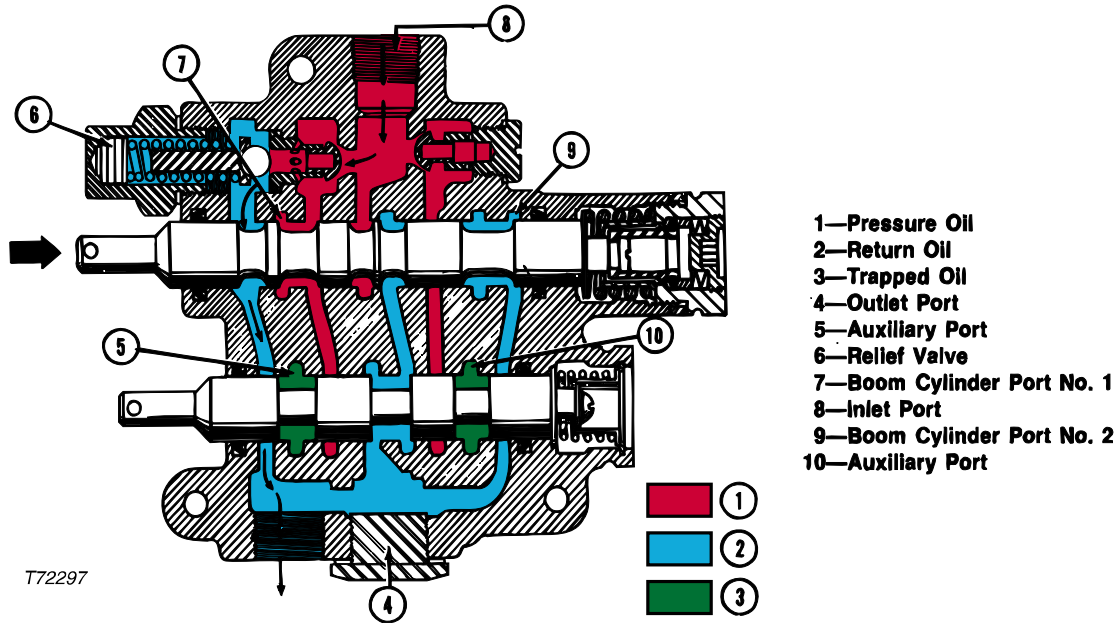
Control Valve in Relief Operation (Two Spool Valve Shown)
